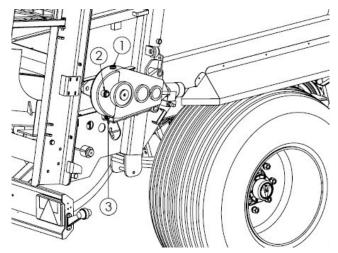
The oil-level check points of the floor-conveyor gearbox 1 - oil inlet (vent), 2 - oil-level sight glass, 3 - drain plug
